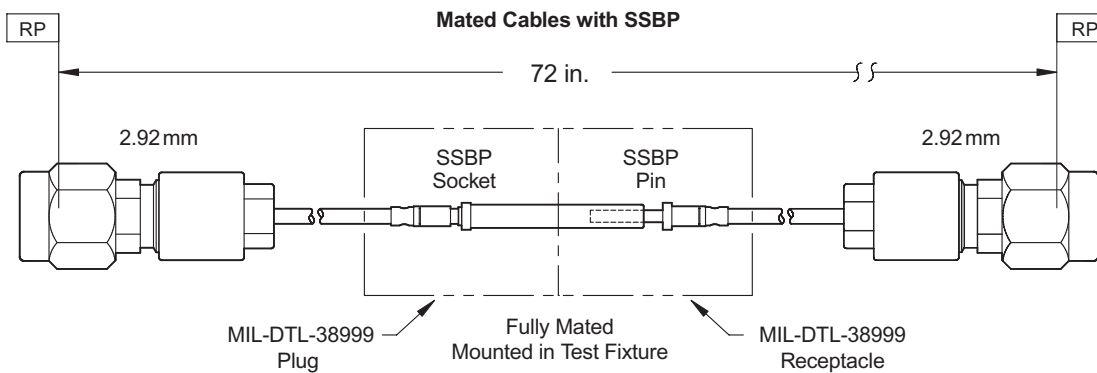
Assembly consisting of two (2) 36 inch cables with 2.92 mm-plug terminated to SSBP-coax. The SSBP pin and socket coaxes are installed in MIL-DTL-38999 Series III connectors.
